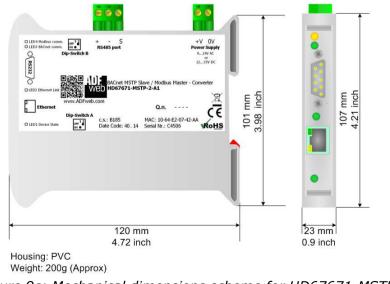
Mechanical dimensions scheme for HD67671-MSTP-2-A1
